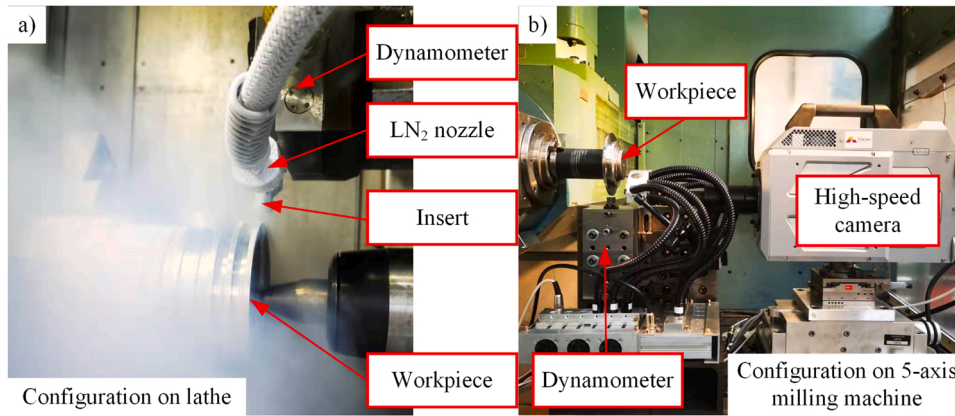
Configurations of experimental set-up, a) set-up for cutting forces measurement with respect to flank wear and different cooling strategies on lathe; b) set-up for high-speed imaging of chip formation under dry condition on 5-axis milling machine.
